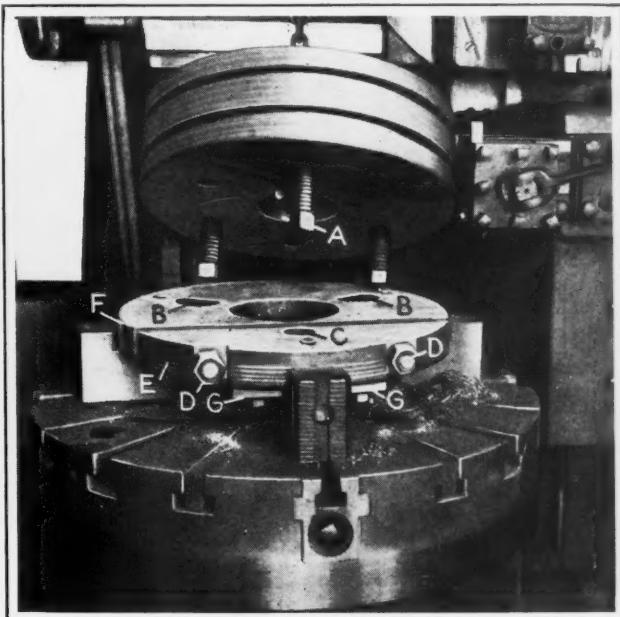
Piston-head Raised to show Studs and Stud Holes in Chuck Plate
